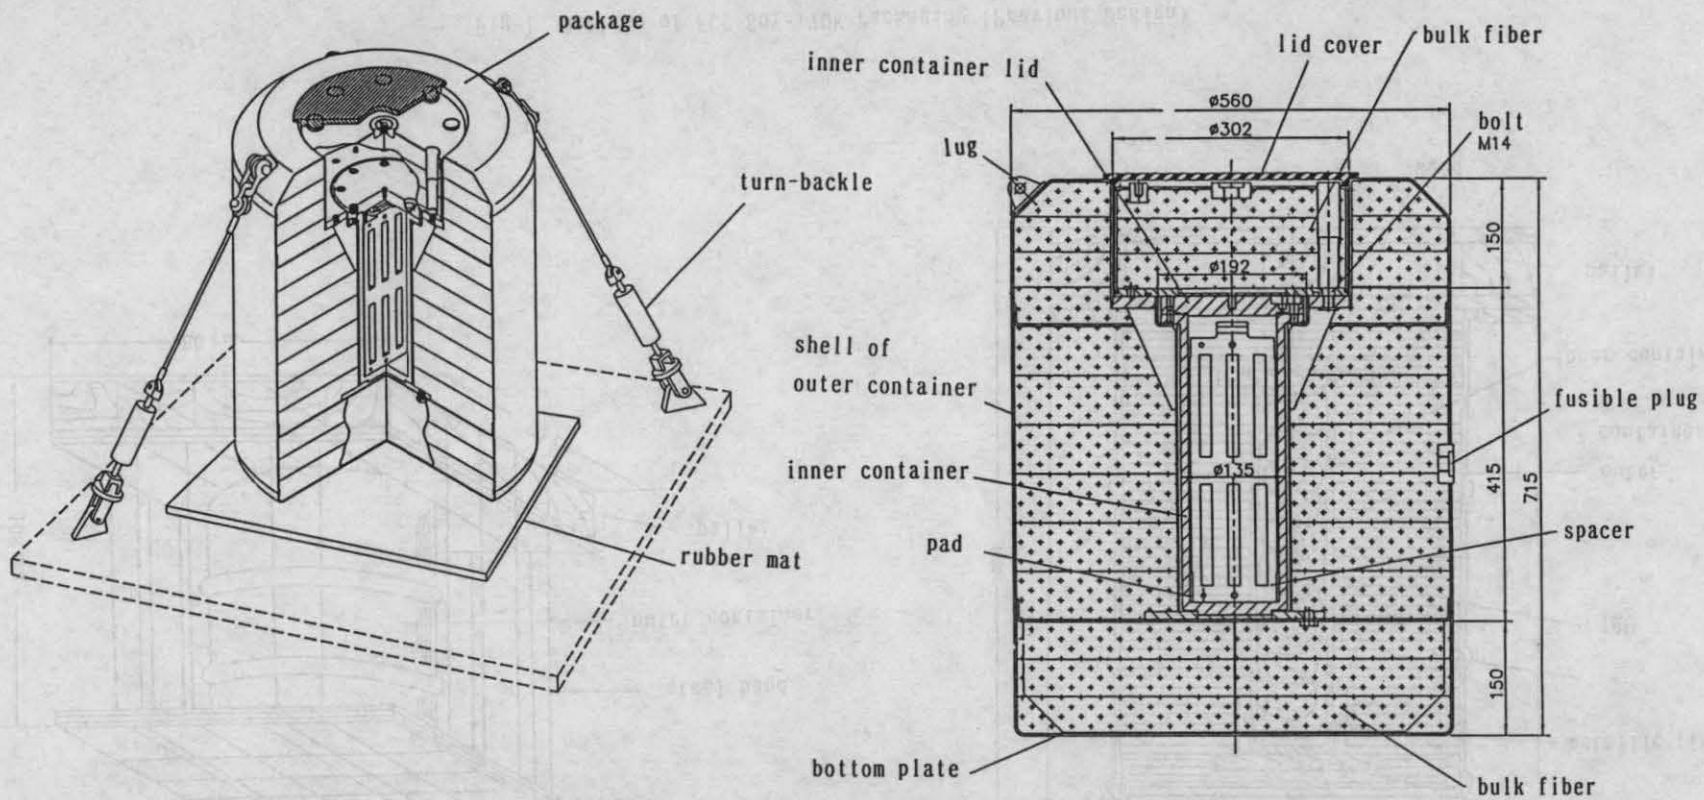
Outline of ACC-90Y-180K Packaging (New Design)
